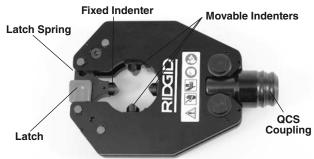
4P-6 4PIN Dieless Crimp Head (interchangeable version)
